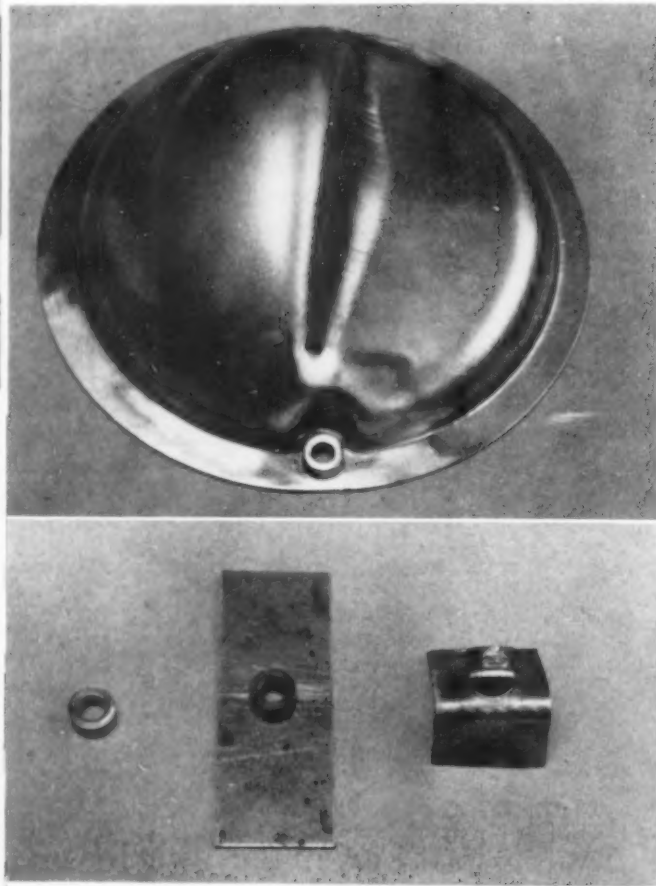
Differential cover assembly produced from setup in Fig. 11. (Bottom) projection is annular ring on boss which completely seals joint. Tests proved developed weld to be stronger than cover material.
